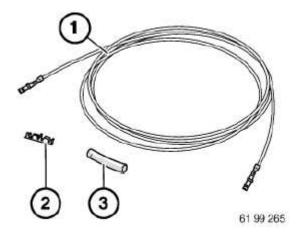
Identifying Crimp Connector And Shrink-Fit Hose Courtesy of BMW OF NORTH AMERICA, INC.
